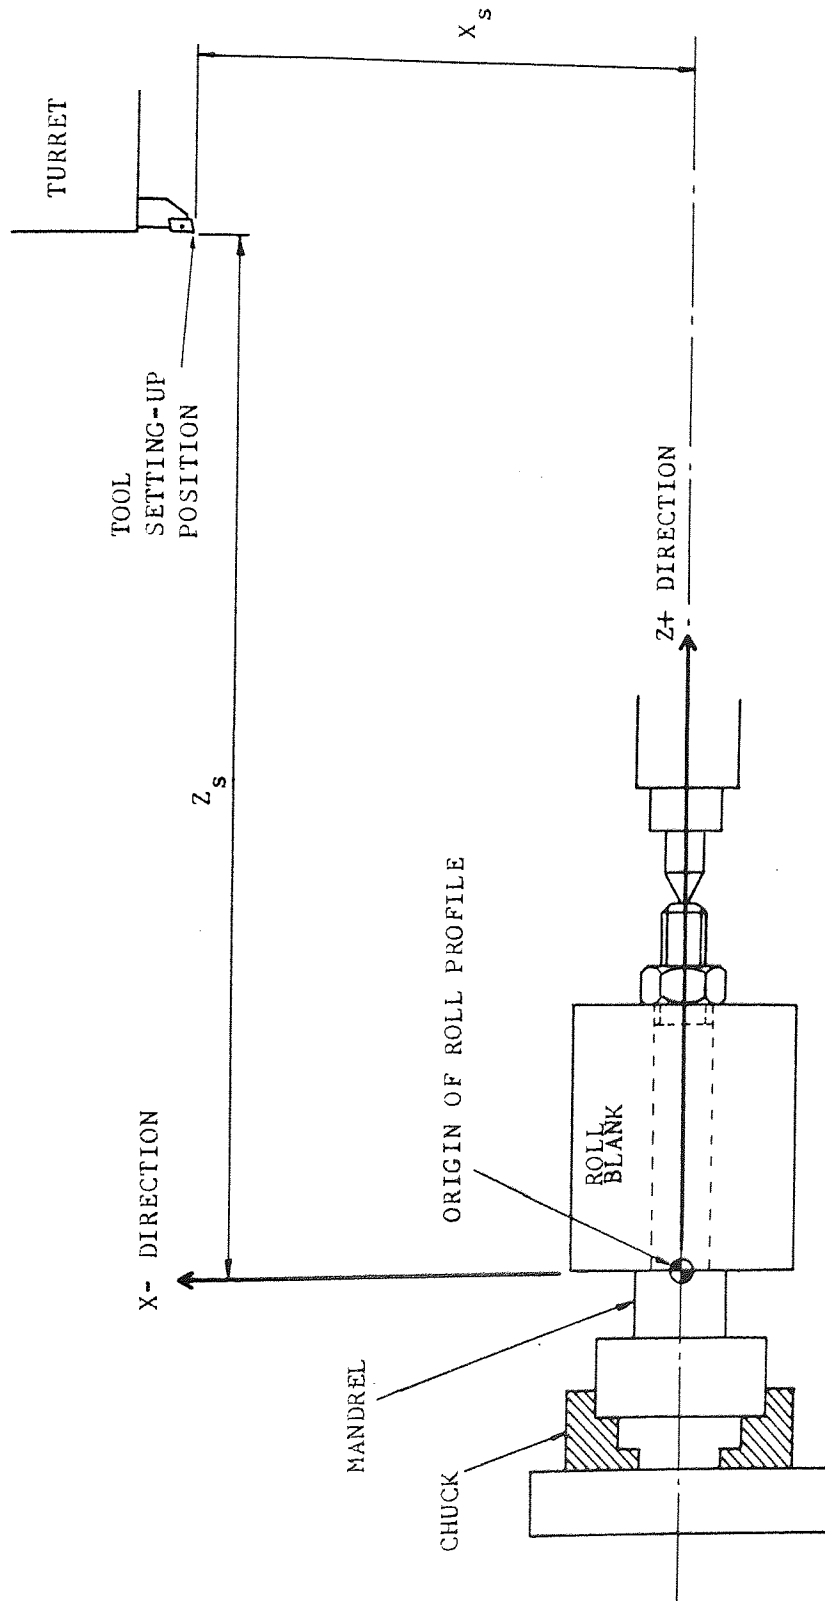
SETTING UP POSITION OF CUTTING TOOL
